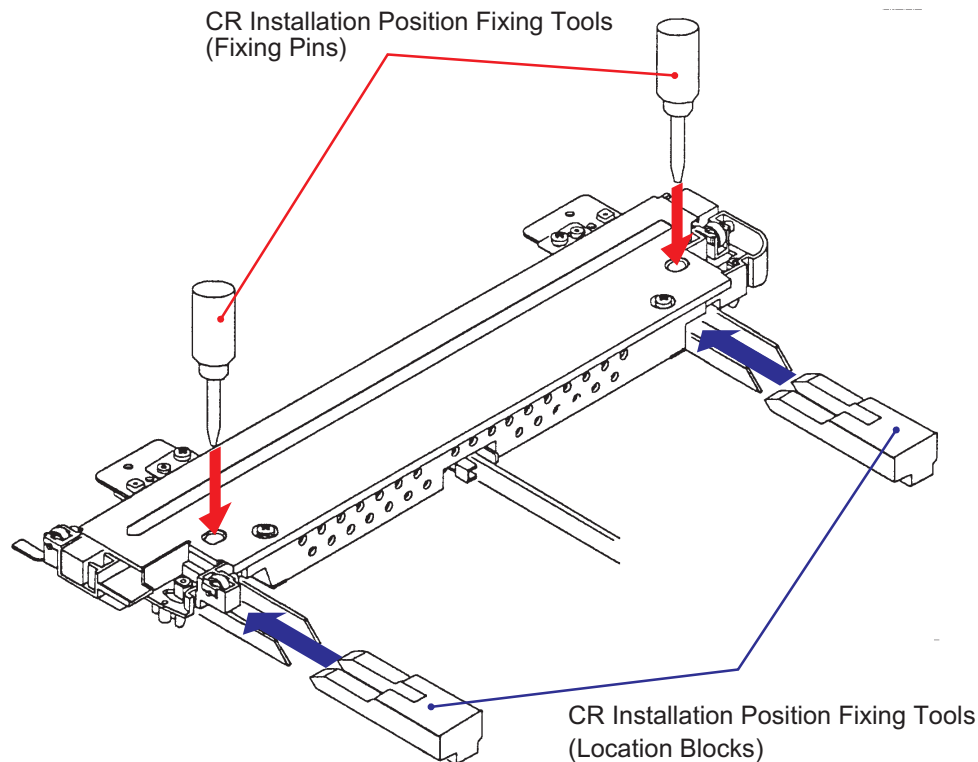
Setting the CR Installation Position Fixing Tool Set
